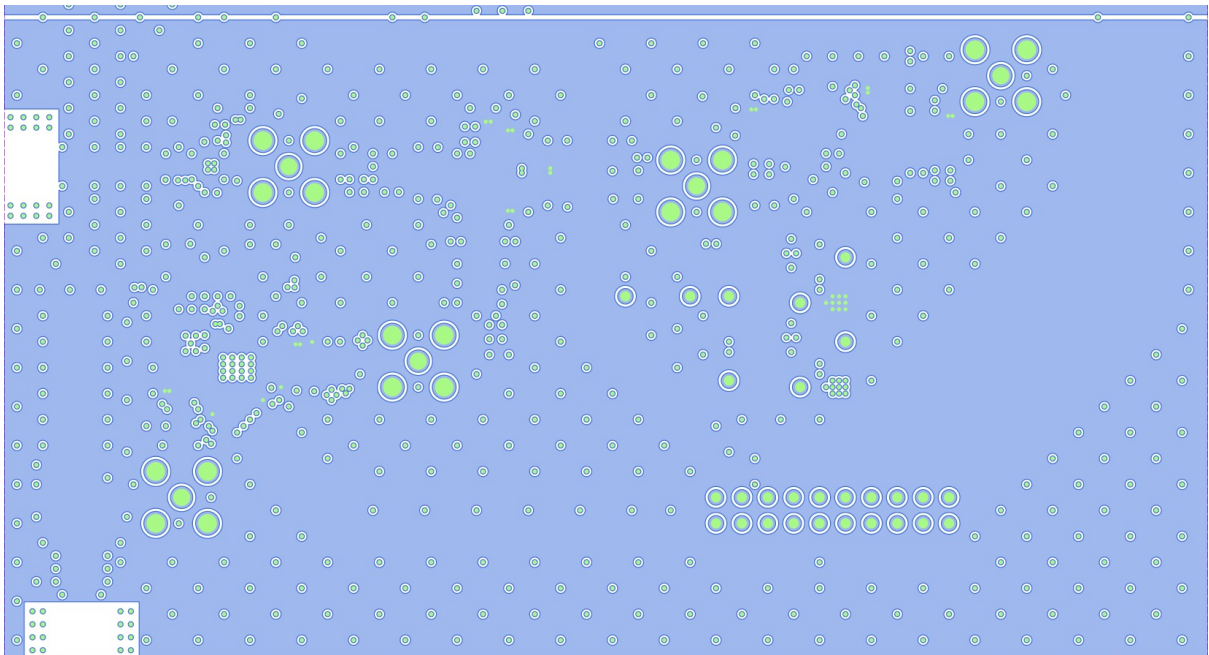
DLL-HPC received signal beamformer PCB layout for element 0 inner layer 3
